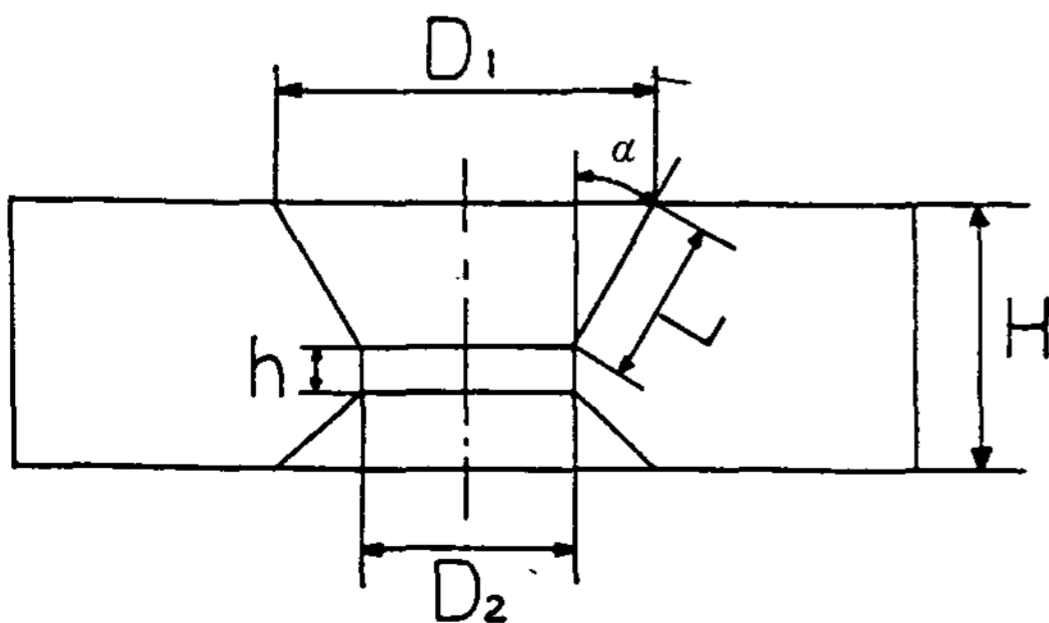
The die shape and dimension of hot extrusion for metal matrix composites
